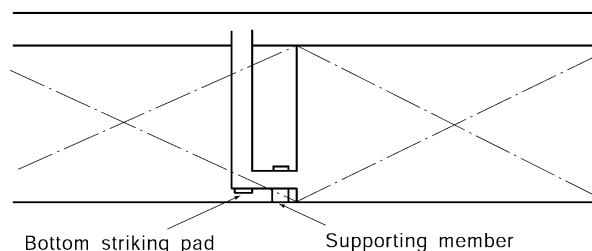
Example of Elbow Type Sounding Pipe Arrangement
